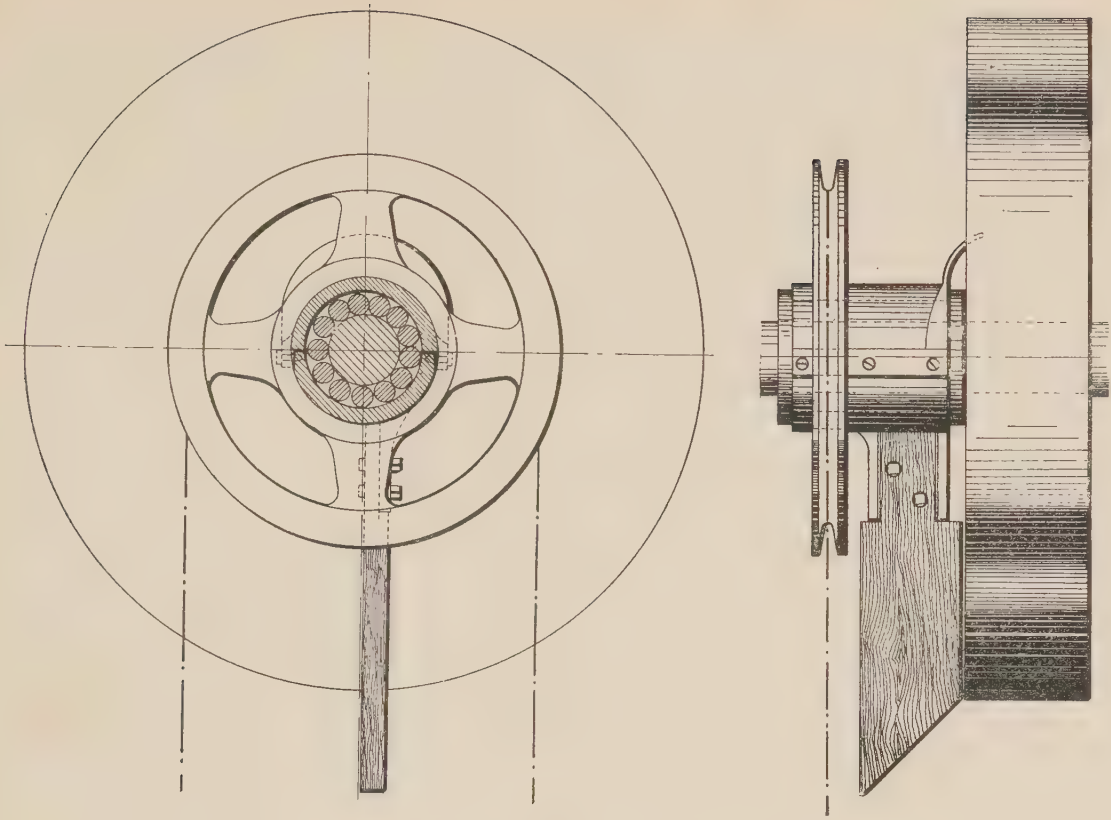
“BRANCHER” MOUNTER SUPPORTED ON SHAFT.
